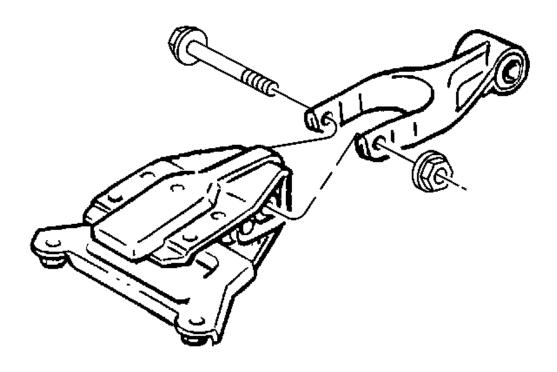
Identifying Engine Mount Strut Courtesy of GENERAL MOTORS CORP.
